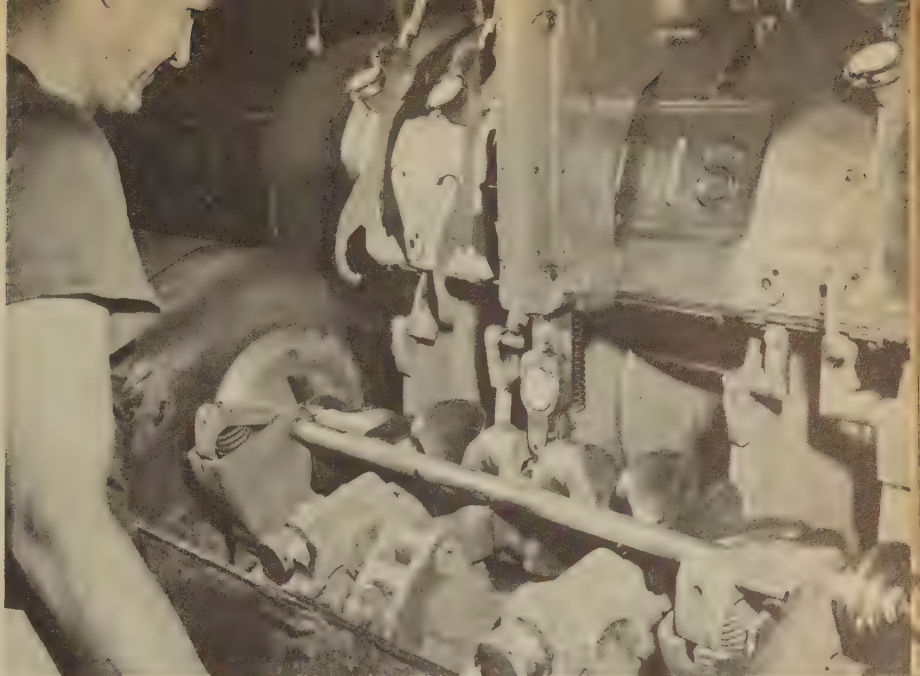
A crankshaft is being loaded into the second pin grinding machine. Chucks are counterweighted to compensate for unbalance in rotating about the crankpin centers.
